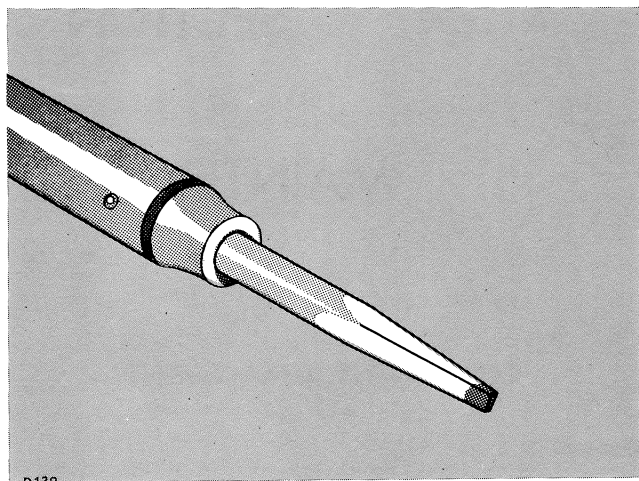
Soldering iron tip properly shaped and tinned.
